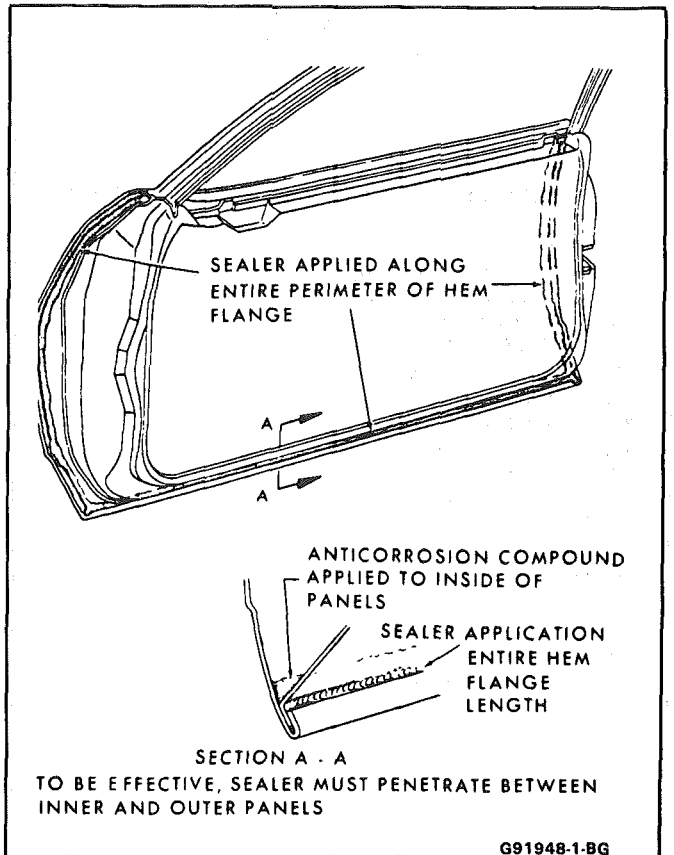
Typical Hem Flange and Anticorrosion Treatment
